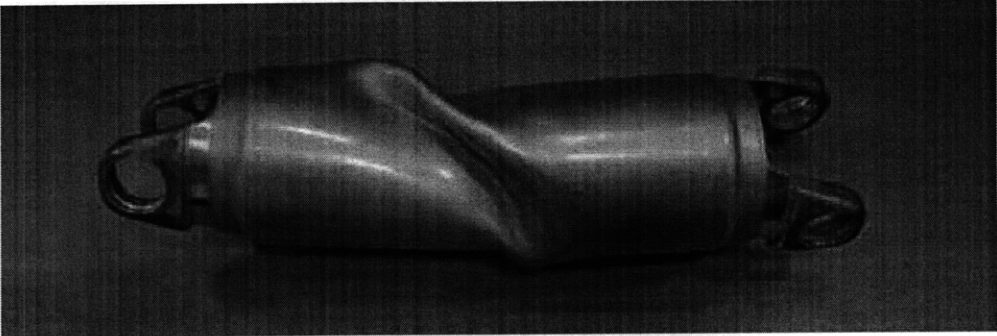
Photograph of the driveshaft, after a torsion test [54].
